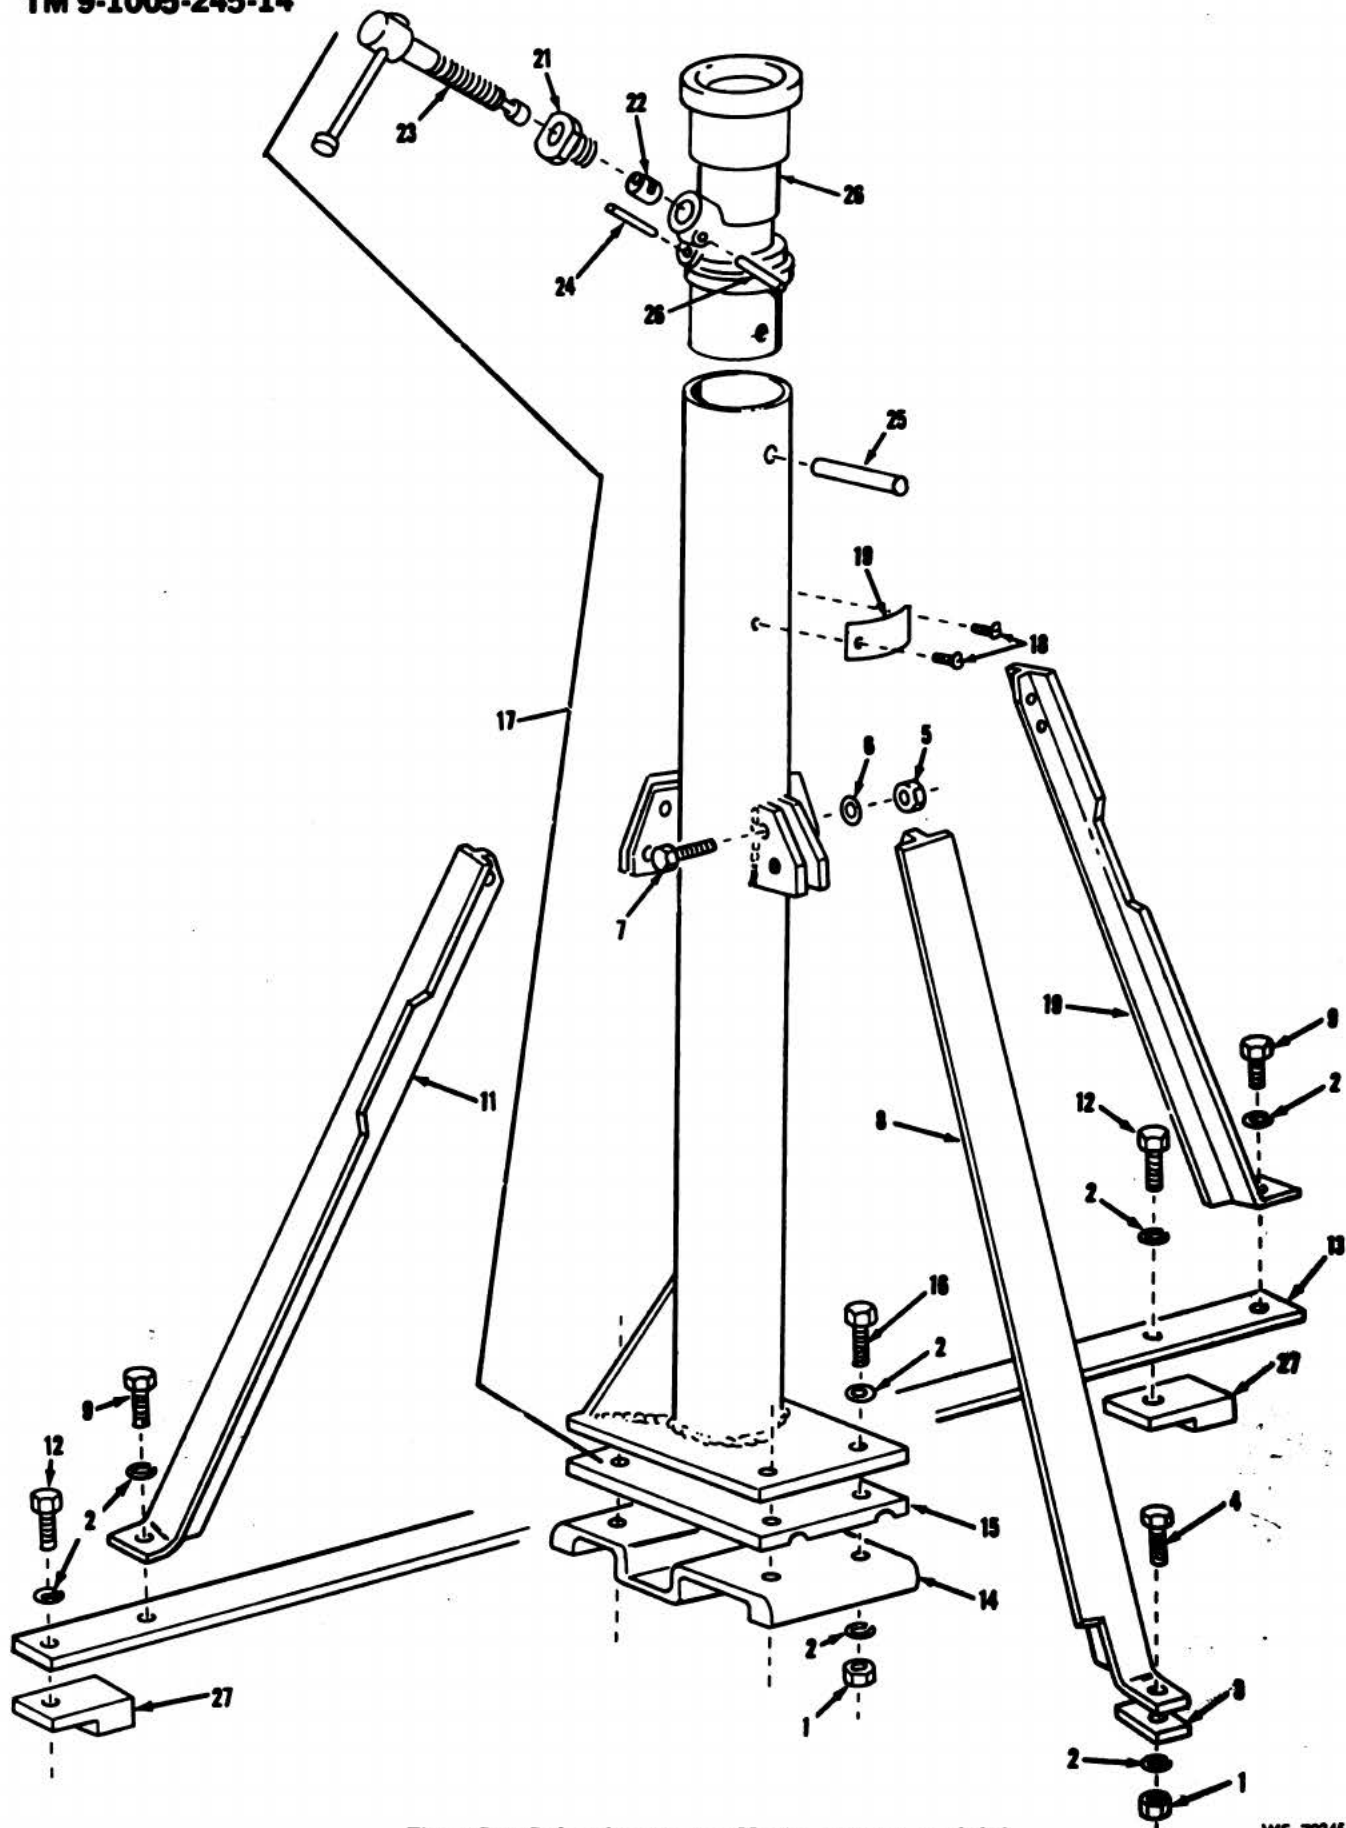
Pedestal, gun mount, M31A1-7380400—exploded view.
